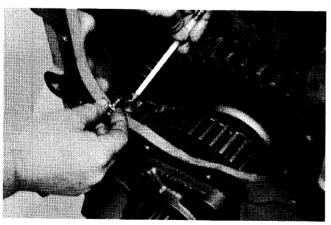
With all clutches and shafts removed, cut lockwire on range shift fork lockscrew. Remove fork lockscrew.
